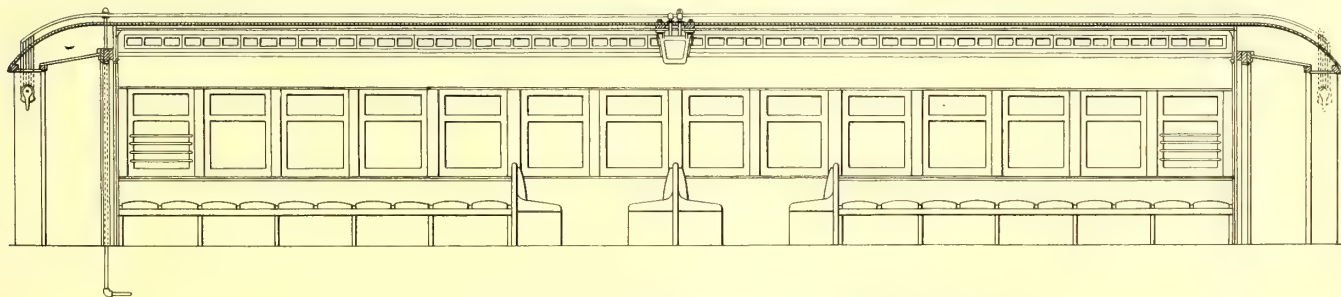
LONGITUDINAL SECTION OF CAR WITH INDICATOR
